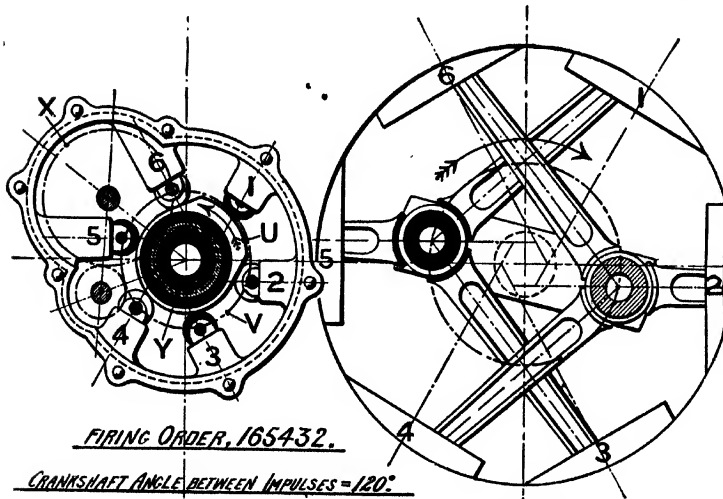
Valve operation of six-cylinder Anzani engine.
